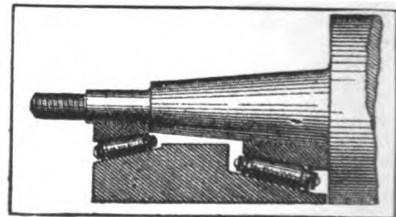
Tapered Roller Bearing. Eliminating End Thrust.
